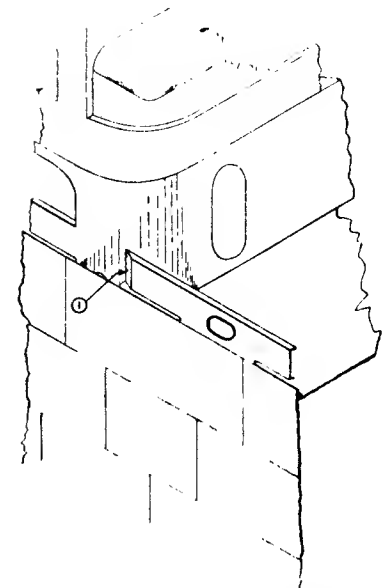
Victory Ships; Typical Bulwark Fracture at Forward End of Deck House
